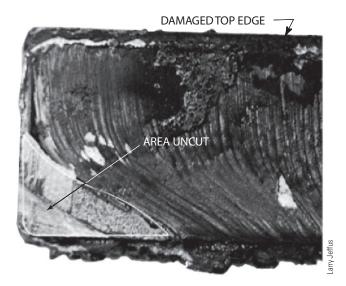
Too fast of a travel speed results in an incomplete cut; too much preheat and the tip is too close, causing the top edge to be melted and removed.
